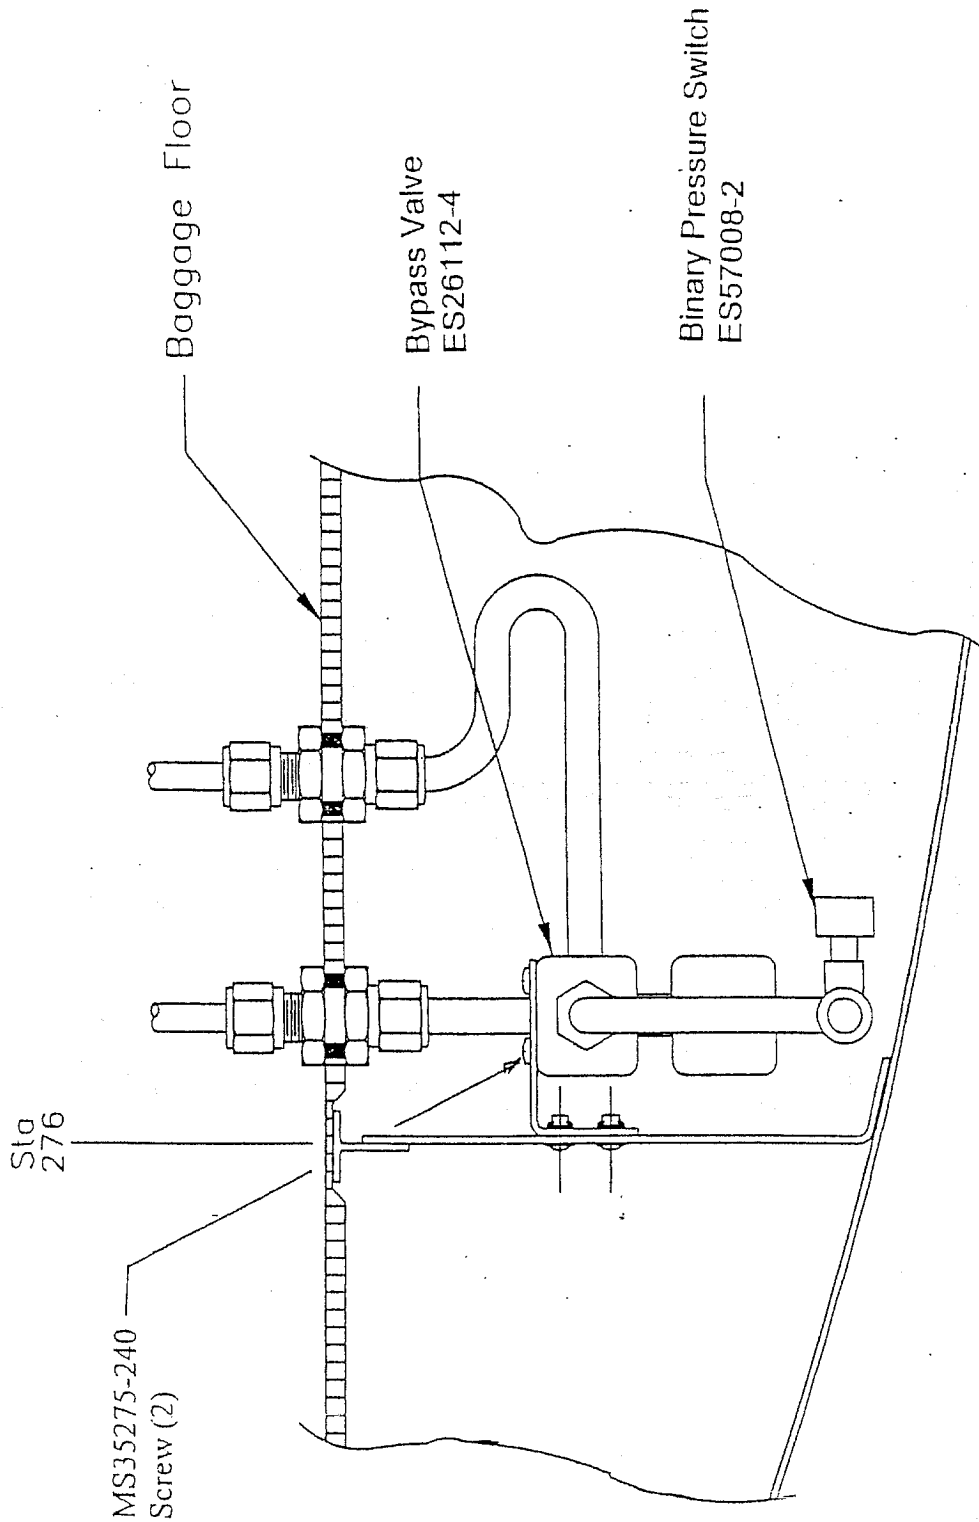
Refrigerant Bypass Valve & Binary Pressure Switch Installation
